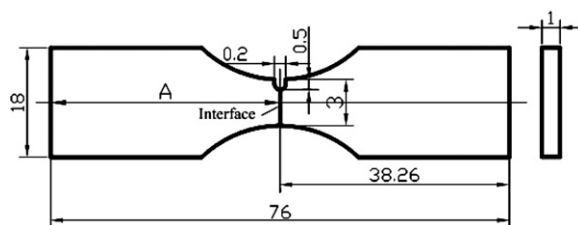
Shape and dimensions of the single edge-notched fatigue specimen (mm).
